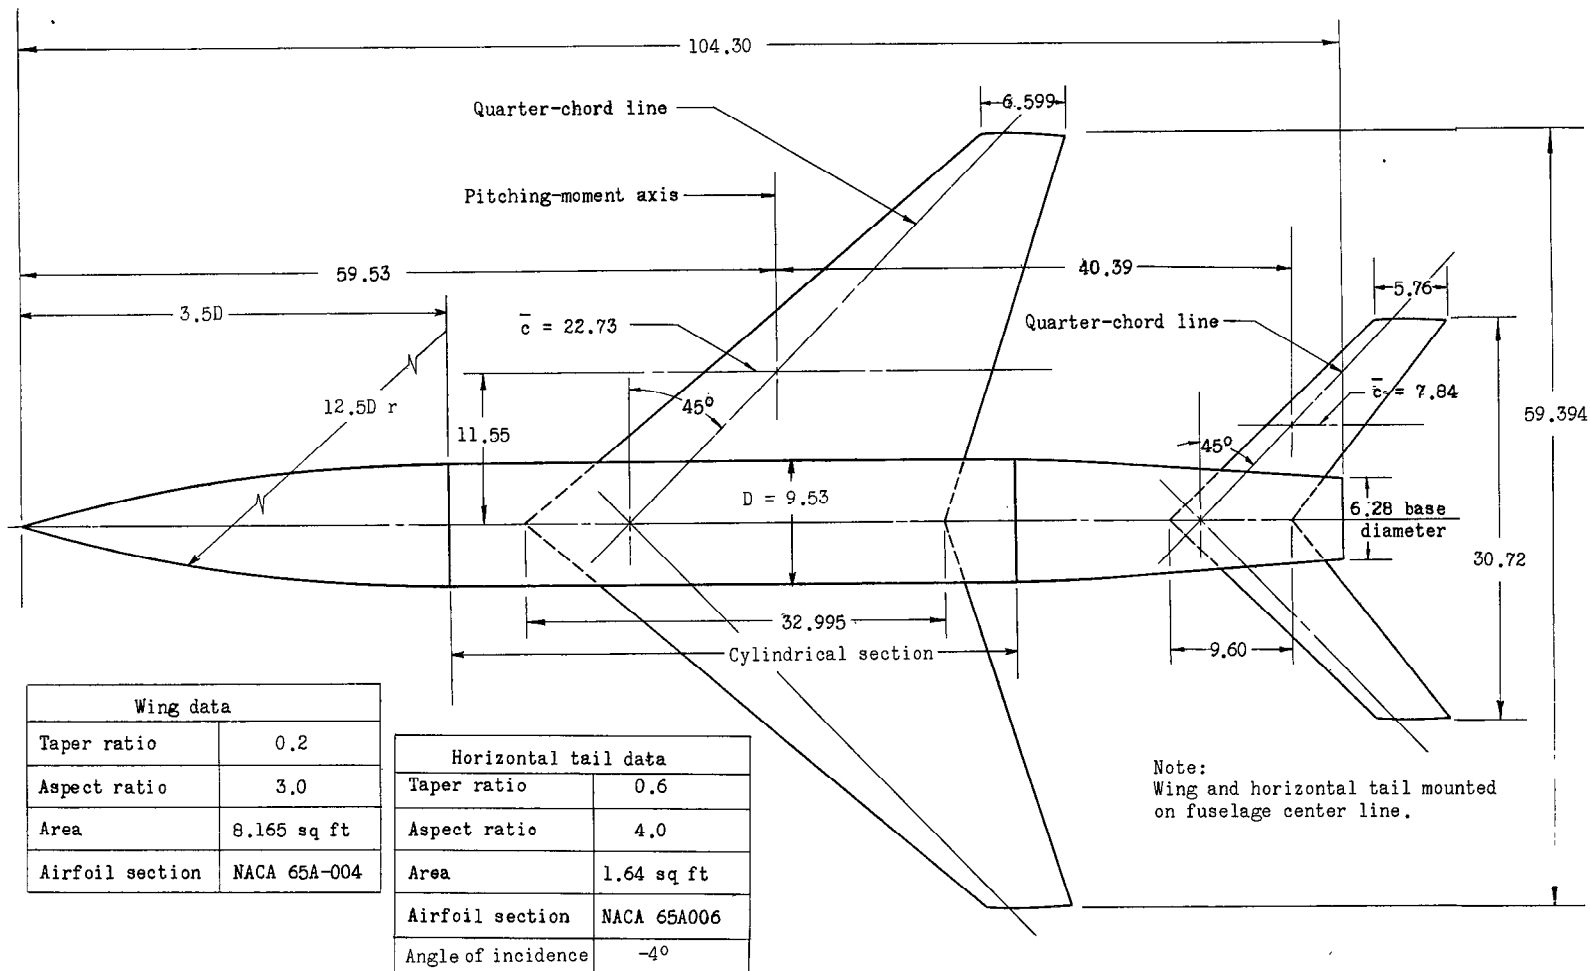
Dimensional details of model. (All linear dimensions in inches.)
